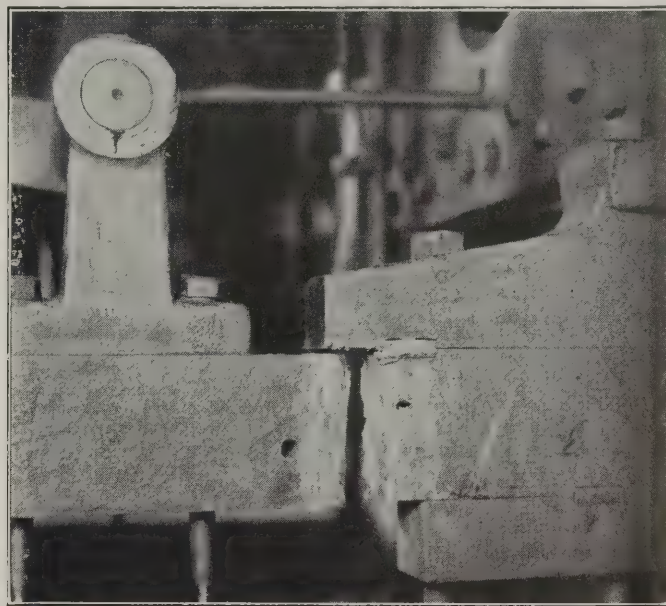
Broken Frame Prepared for Electric Welding
